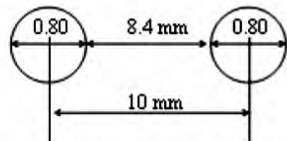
Dimensions [mm] of the holes drilled in the specimen
